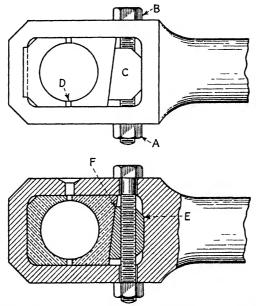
Shoulder wear on connecting-rod bearing. (Courtesy of Power.)
